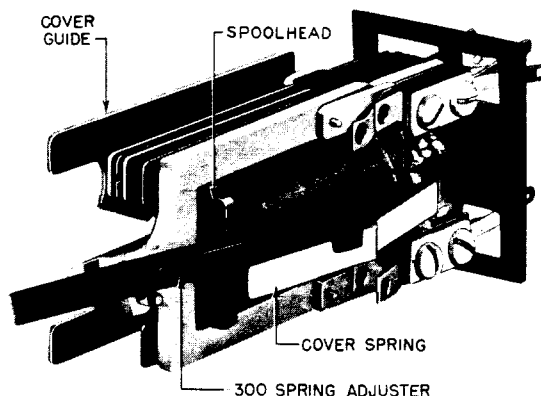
Fig. P — Method of Adjusting Cover Spring Pressure — 271-Type Relay Shown
